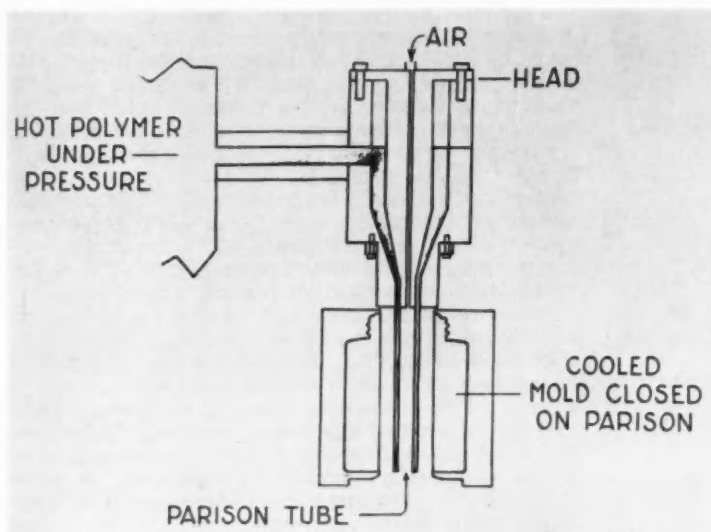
BASIC BLOW MOLDING PROCESS. Tube of heated, air-formable material is extruded from cross-head die as indicated.
